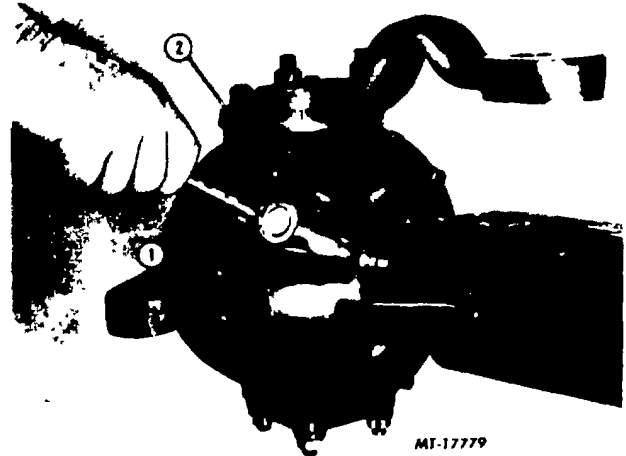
Removing Retaining Ring Half (Halves) Mounting Bolts
